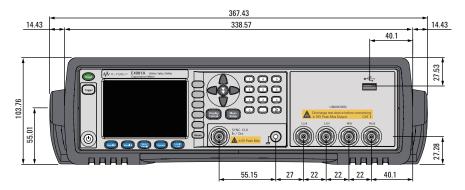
Dimensions (front view, with handle and bumper, in millimeters, nominal)
